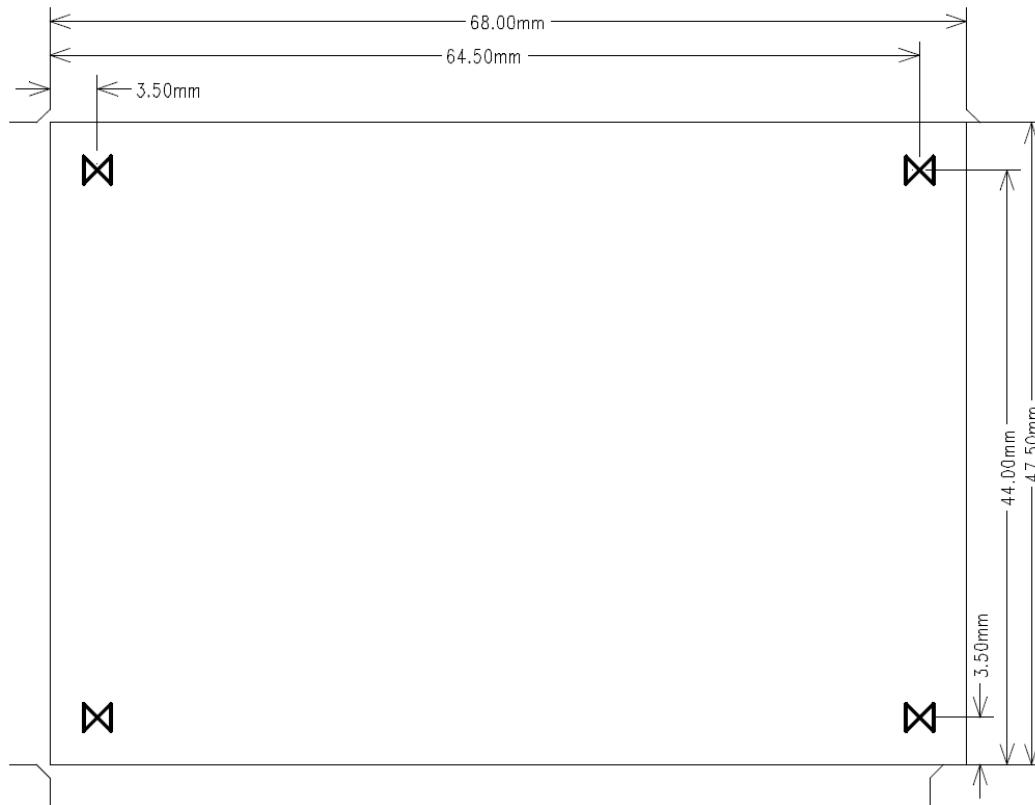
Dimension of MCST3601 and position of mounting holes
